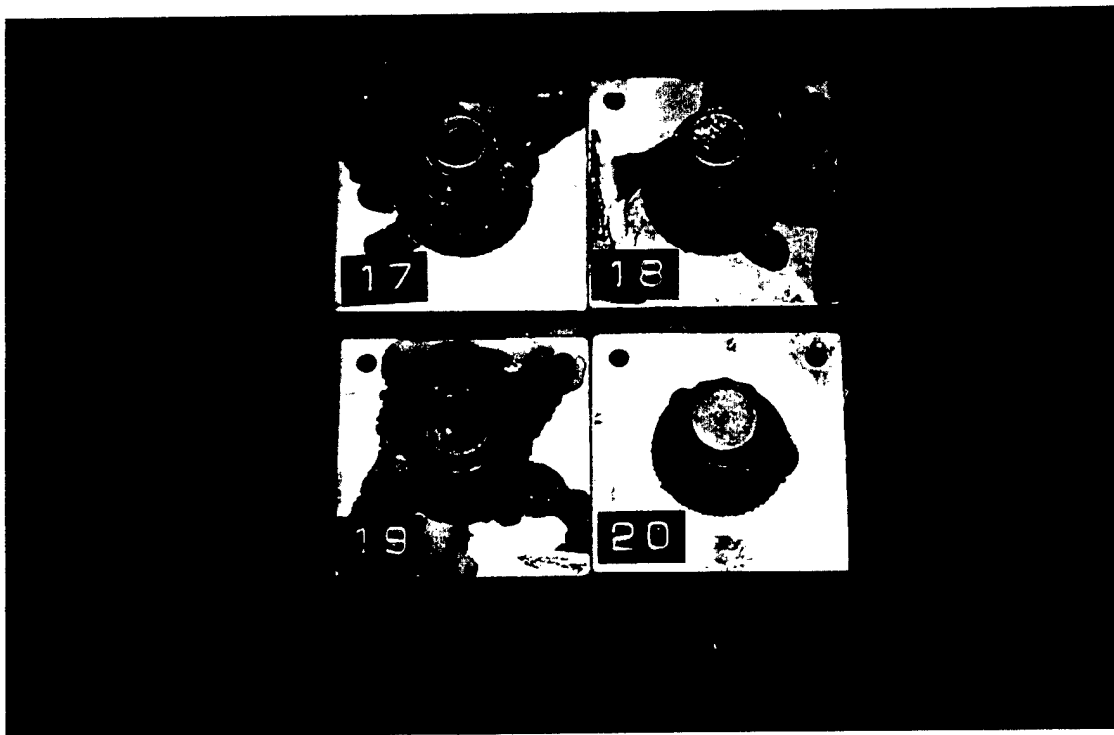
H11 Chromium Hot Work Tool Steel Nuts With IVD Al Coating After 15 Days of Salt Spray. Reduced 25%.
